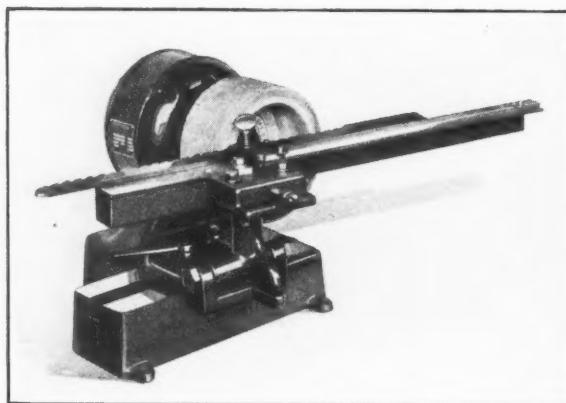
Wells Hand-operated Sharpening Machine for Keyseat Cutters
